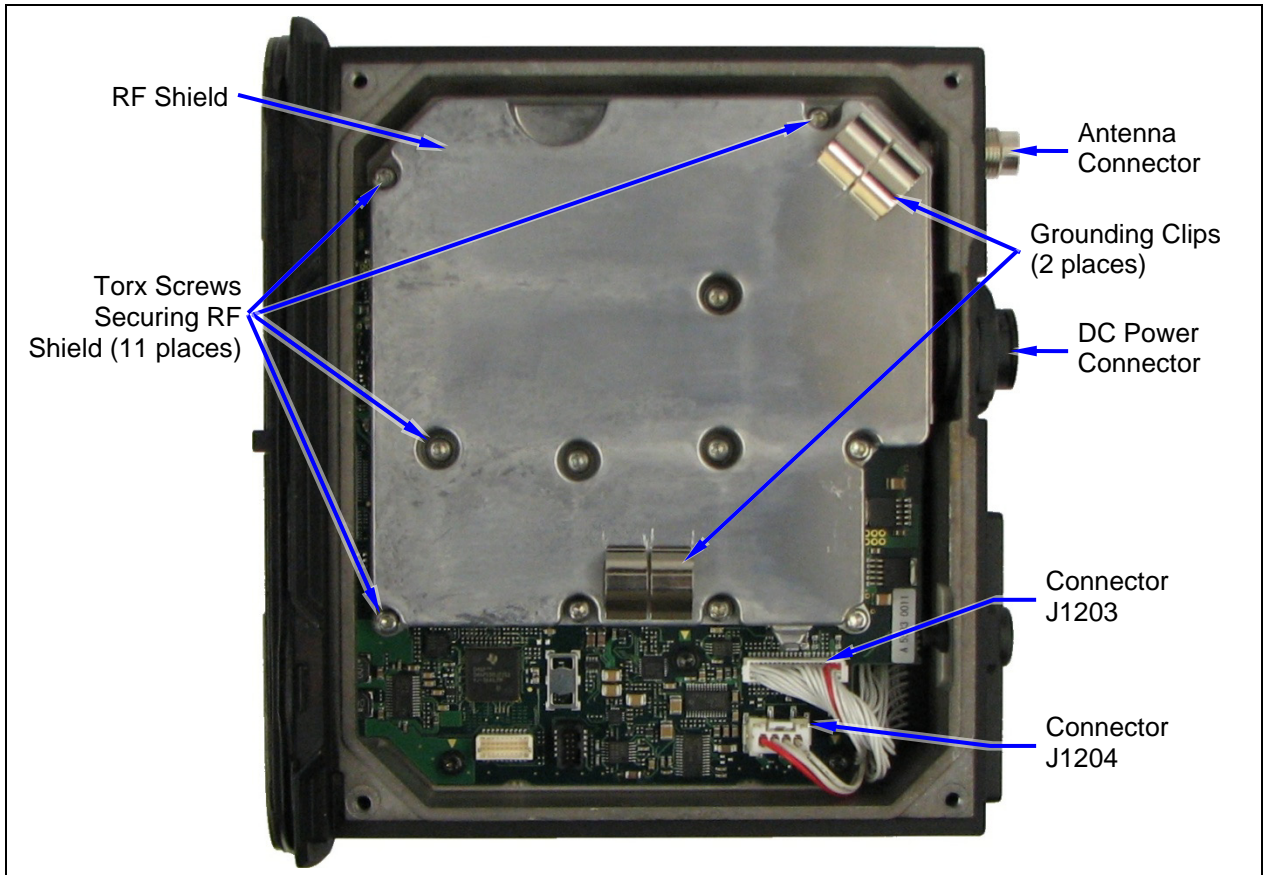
Removing the Main board (Radio Shown Without Bottom Cover)
